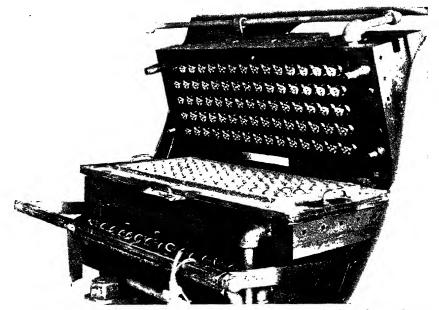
Loading board with spherical preforms, or "pills," ready to charge mold. (Westinghouse Lamp Co.)
